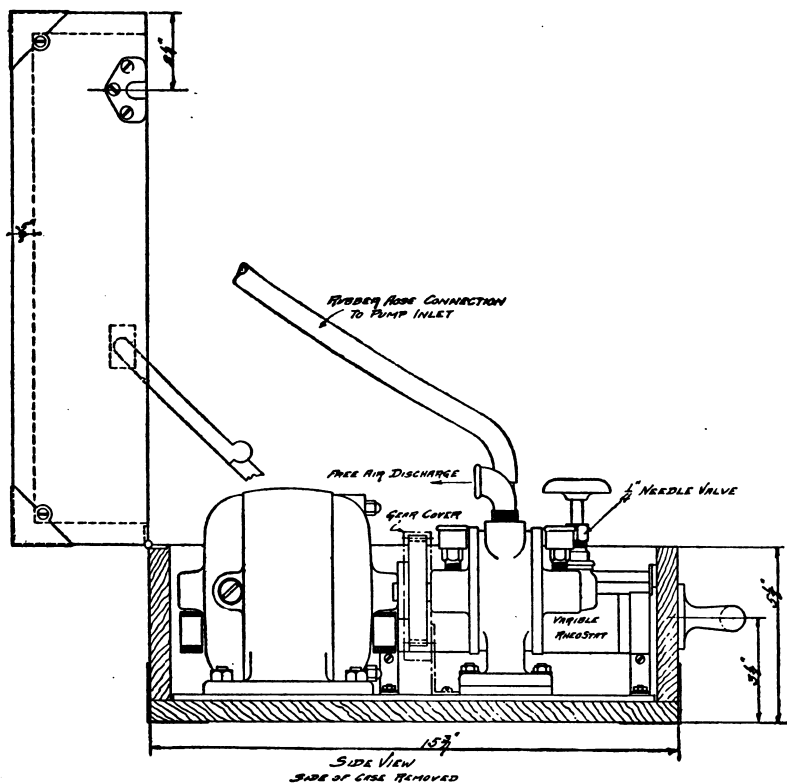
Drawing of electrically driven suction apparatus, side view.
